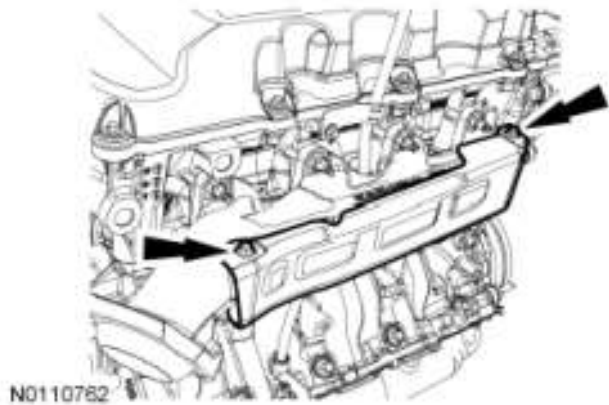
Locating Exhaust Manifold-To-Cylinder Head Studs
